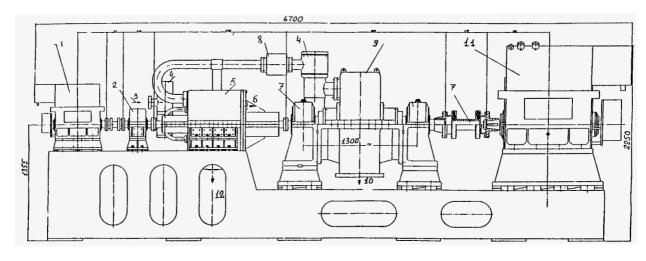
Steam turbine with RST 1-generator RST, 2-reduction gear, 3-two-phase flow input, 4-valve. 5-rotary separator RST, 6-water inlet. 7-bearing, 8-compensator. 9-steam turbine, 10-steam to condenser. 11-main generator, 12-drainage
